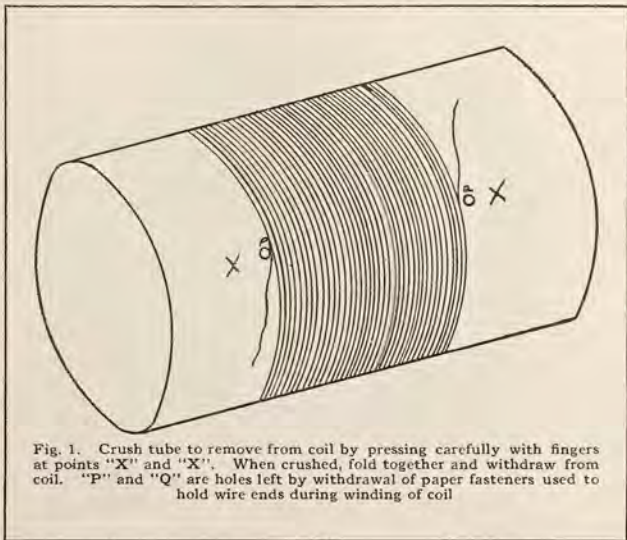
Crush tube to remove from coil by pressing carefully with fingers at points "X" and "Q". When crushed, fold together and withdraw from coil. "P" and "Q" are holes left by withdrawal of paper fasteners used to hold wire ends during winding of coil
